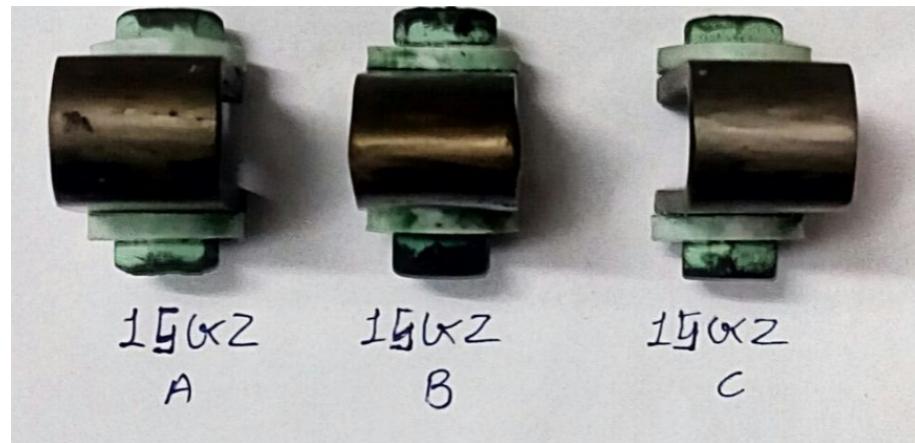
Crack appears in 11 Ni 22 Cr Weld Sample
